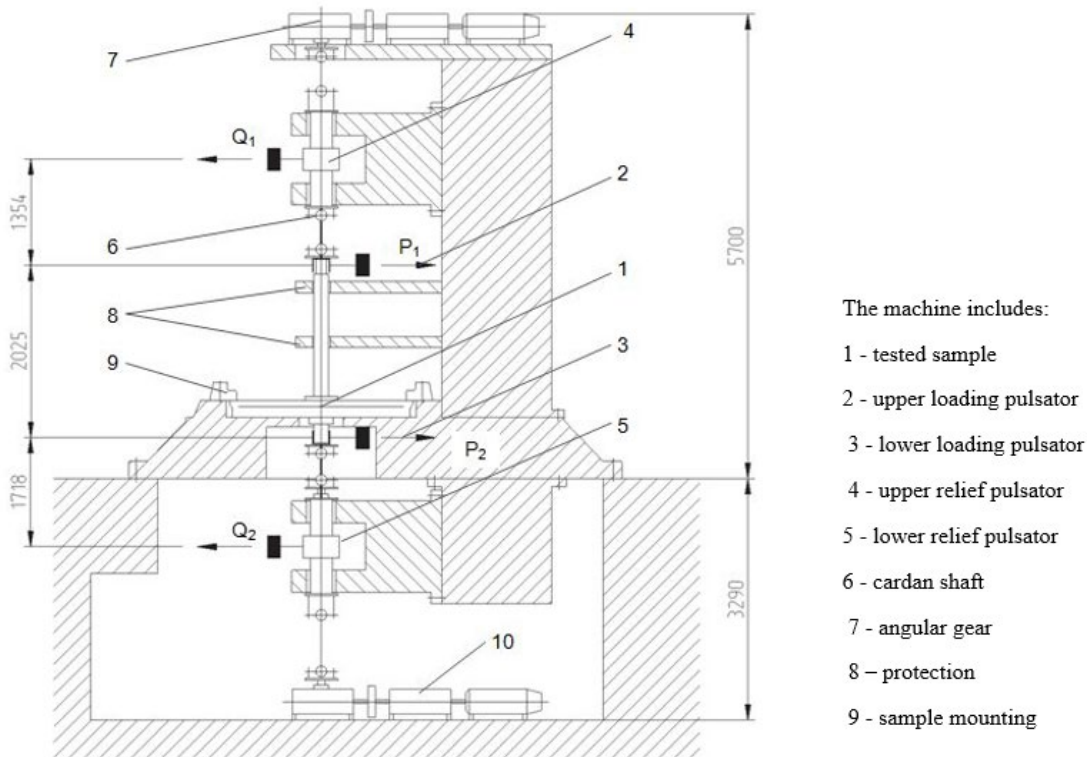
Scheme of a fatigue machine for testing axles and wheels of wheelsets [7]
